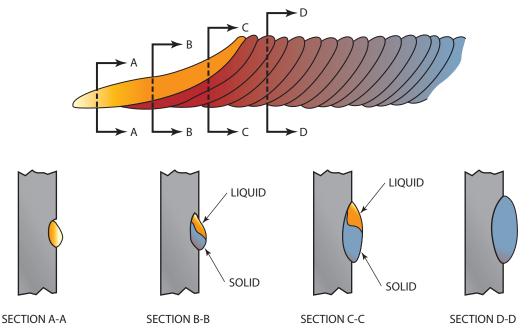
(A) Along the leading edge, a small molten weld pool is held in place by surface tension. (B) Farther back along the weld, the lower edge begins to solidify holding the small molten weld in place along the top edge. This process continues through (C) forming a uniformly shaped solid weld (D).
